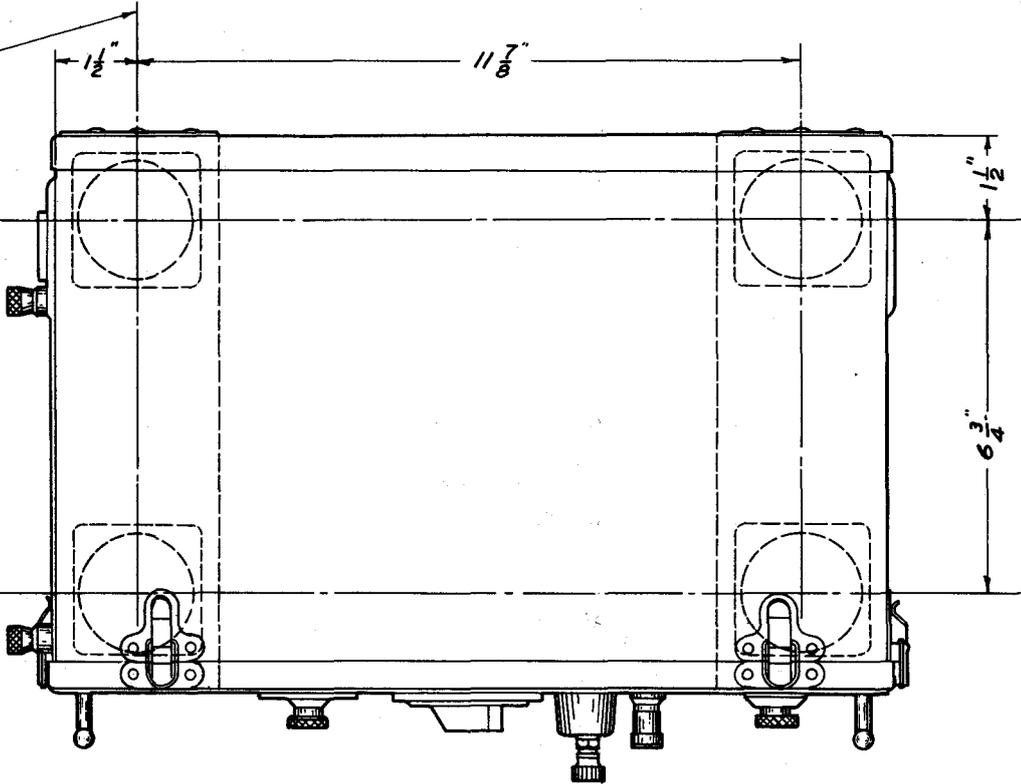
FRONT VIEW COIL & CAPACITOR ASSEMBLY
